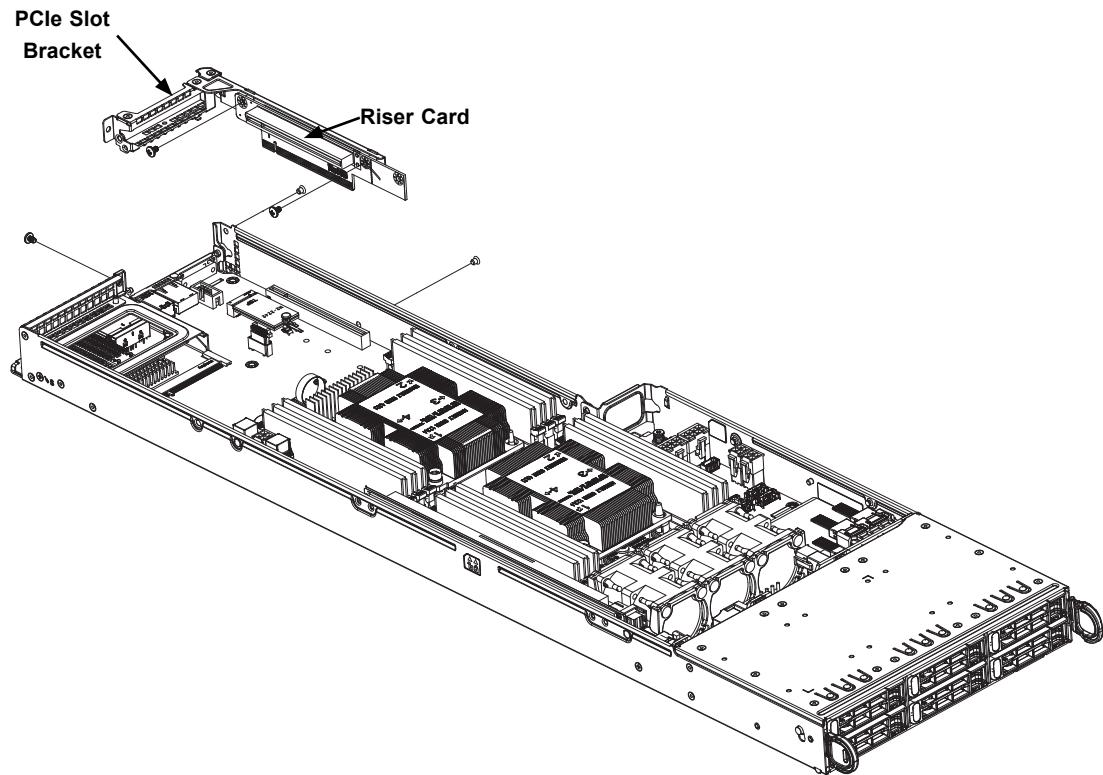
Installing the PCIe Slot Bracket Assembly
